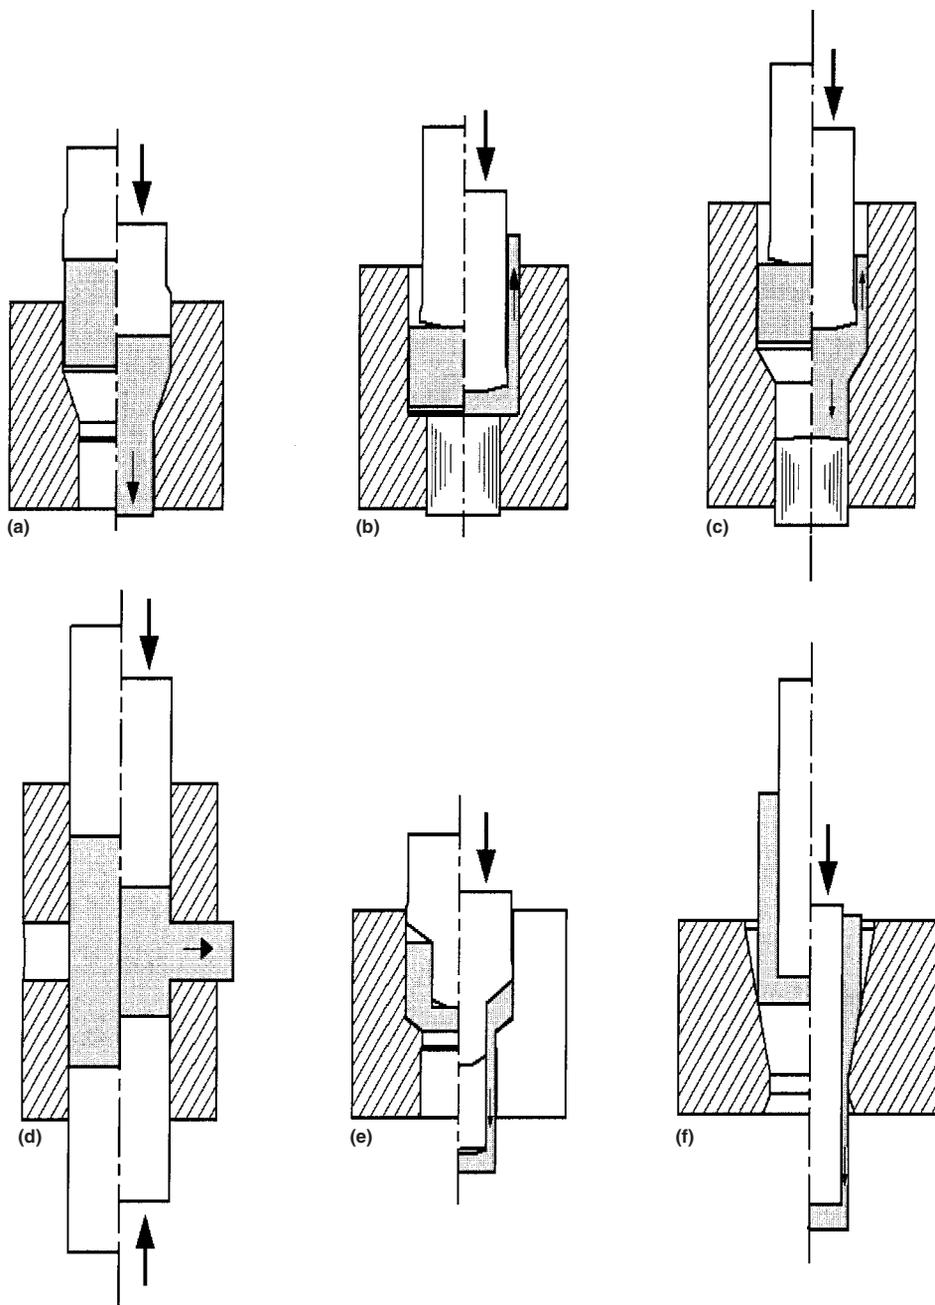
Displacement of metal in cold extrusion. (a) Forward extrusion. (b) Backward extrusion. (c) Combined backward and forward extrusion. (d) Lateral extrusion. (e) Hooker extrusion. (f) Ironing
